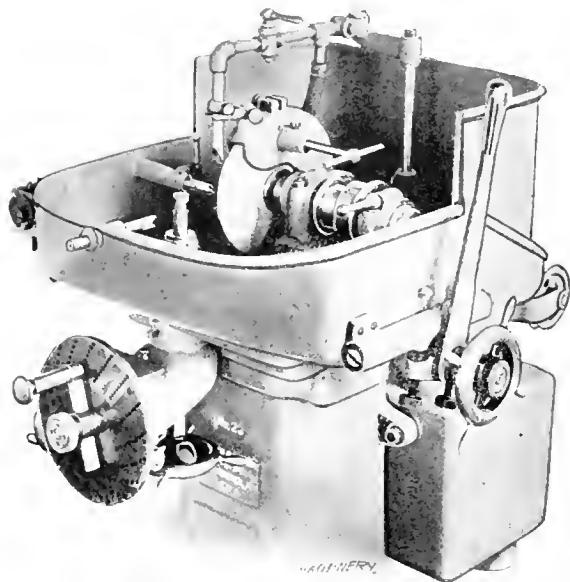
Details of the Wheel Feed and Work-holding Arrangements.
